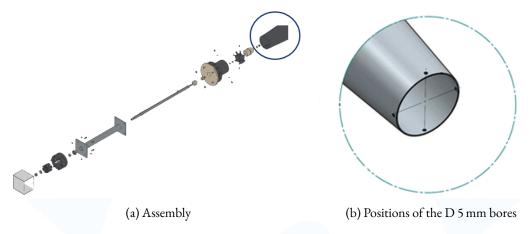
Assembly of the tube and positions of the D 5 mm bores
